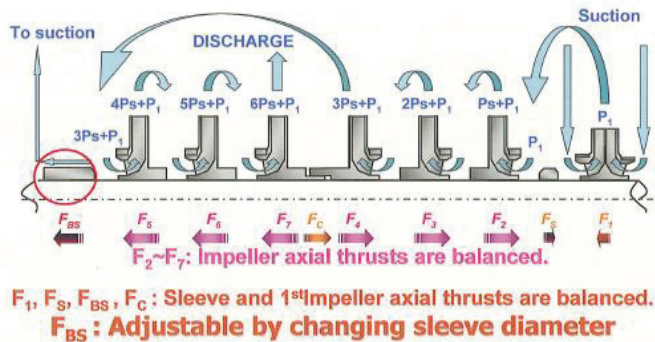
Thrust balance mechanism of back to back impeller arrangement multi stage pump
